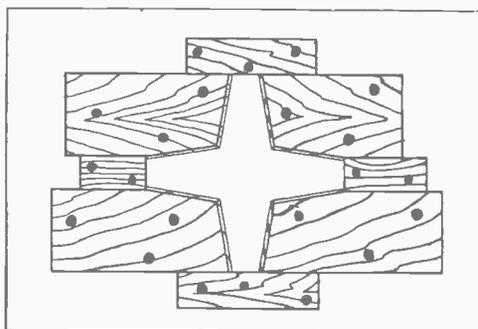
MOULD FOR CASTING BATTERY ZINC
